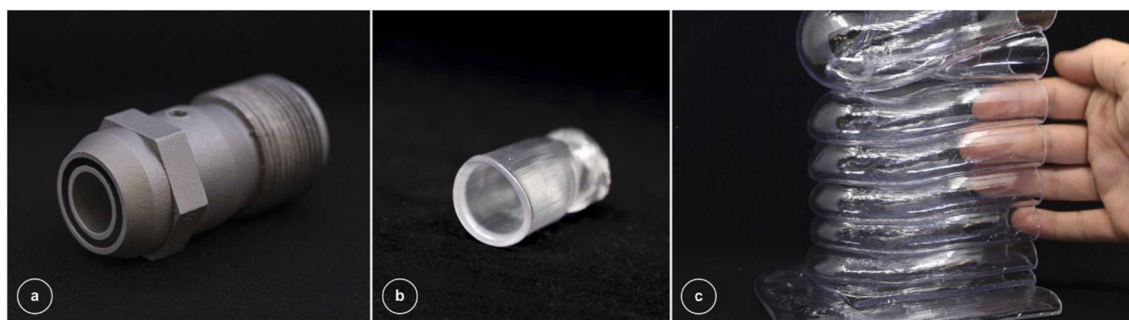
(a): Hollow-Core 3D printing nozzle with a 24 mm orifice and a 2 mm wall thickness. (b): Extruded PETG bead. (c): 3D printed sample, cut, with a hand to represent scale and transparency, adapted from Ref. [146].
